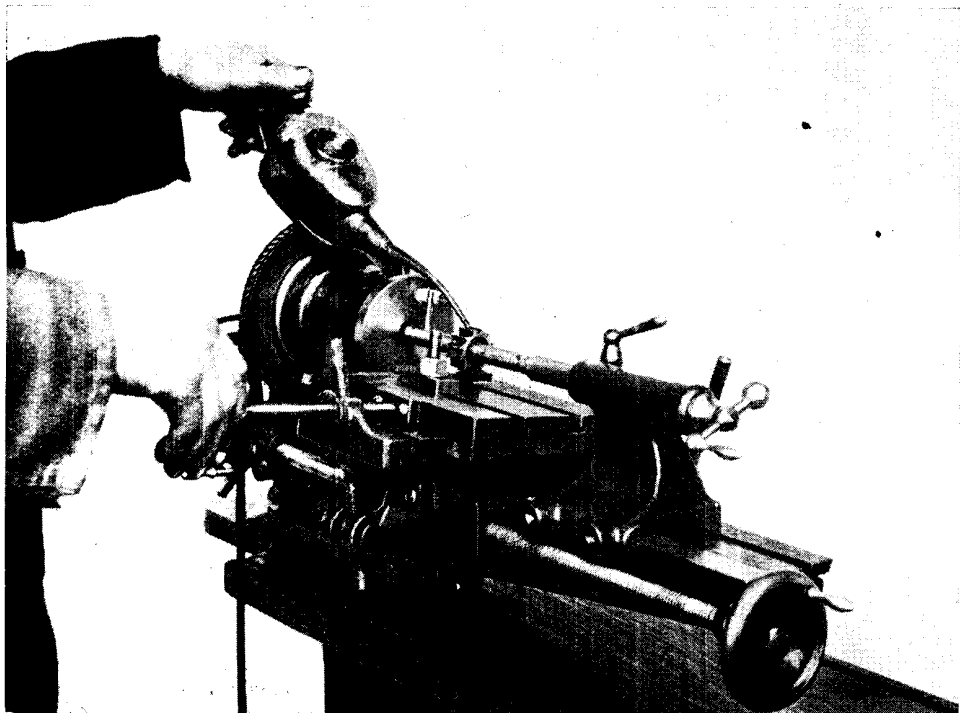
On this small lathe, as used by many amateurs, the J.R. milling attachment is seen in use. The work is mounted on the milling table, which can be raised or lowered and traversed across or along the bed at will
